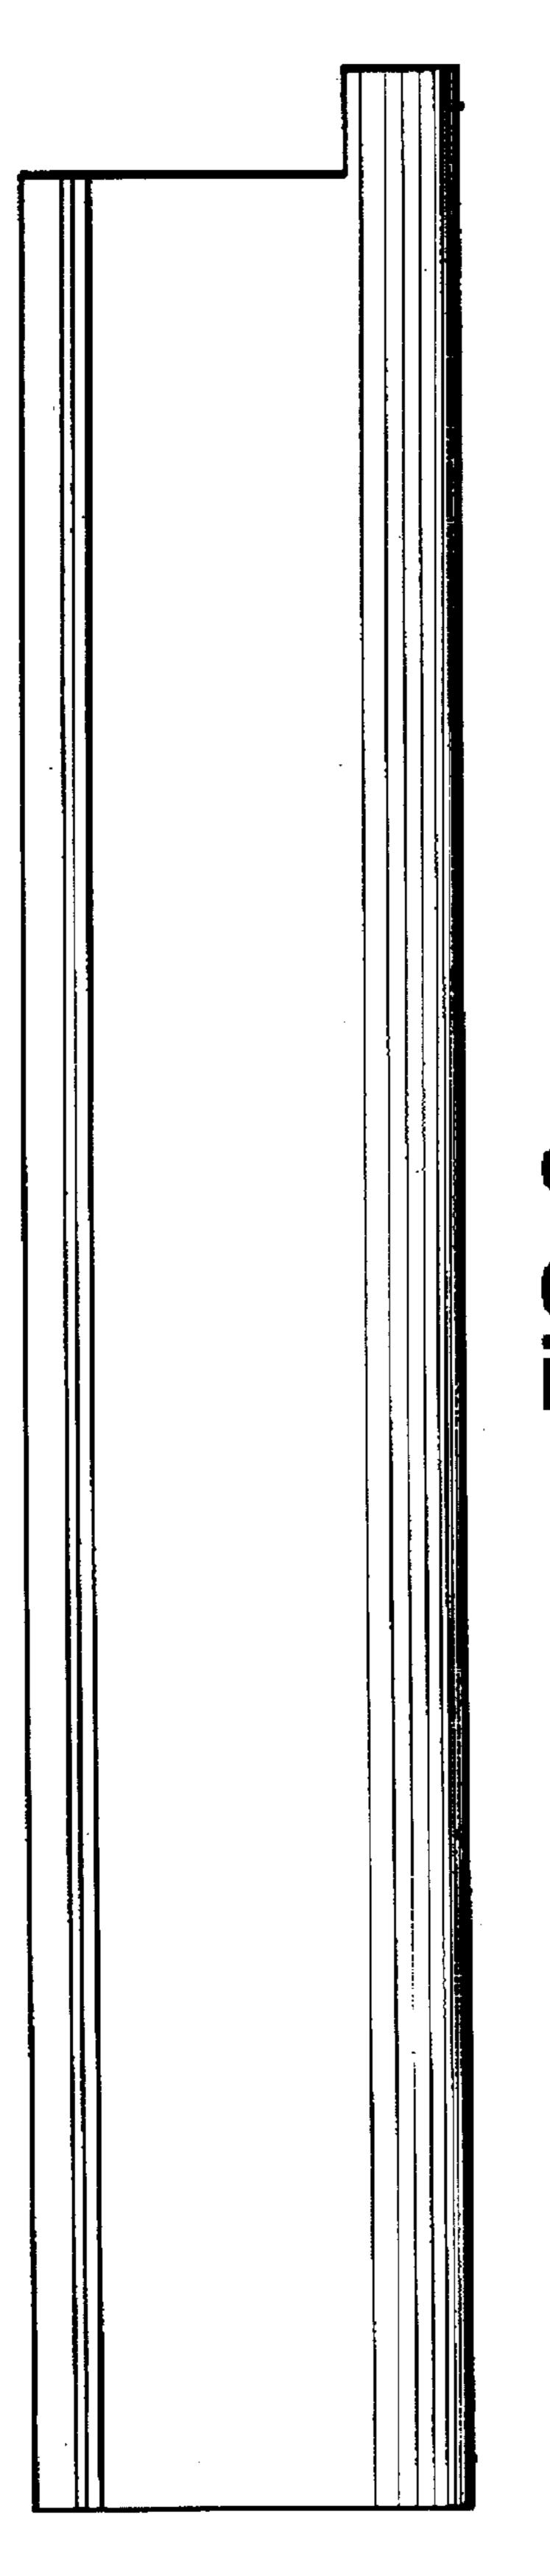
is a side elevational view of the front section of the trim piece opposite that shown in FIG. 6.
